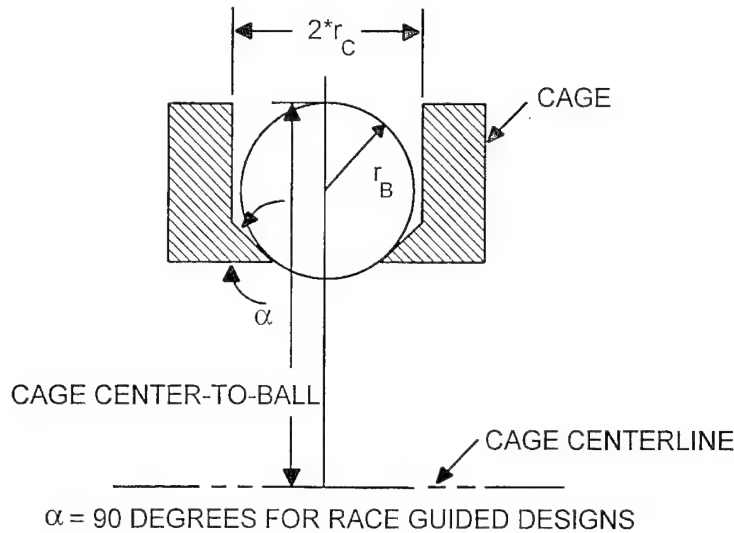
Illustration of Ball Cage-to-Center Parameter Necessary for Ball Guided Cage Designs.
